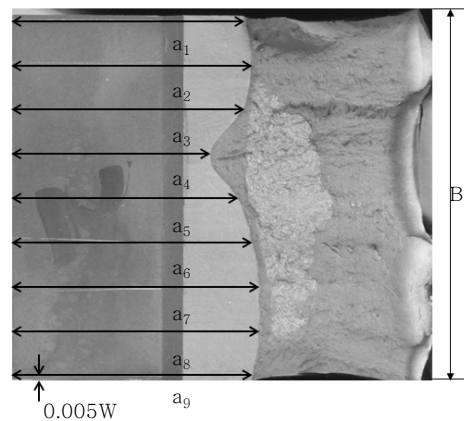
Non-uniform pre-crack shape in as-welded specimen after CTOD test
